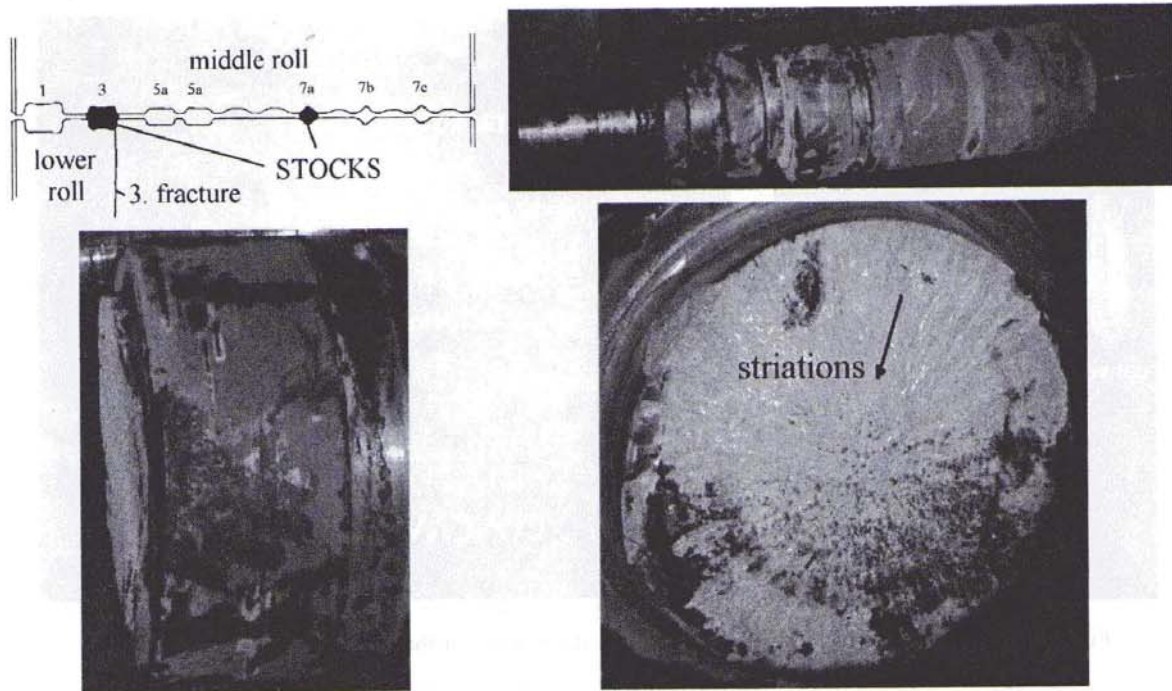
Fracture surfaces of the third broken roll and the position of the stocks in time of the fracture.
